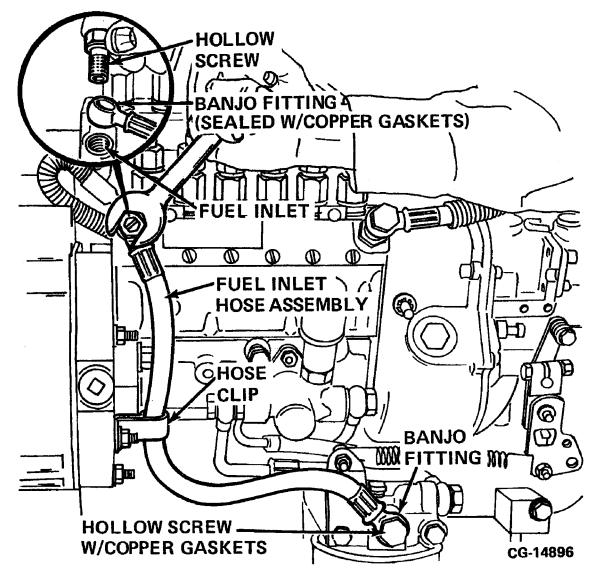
Remove the Fuel Inlet Hose Assembly
